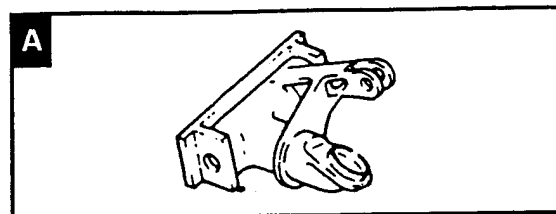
C-141 Main Landing Gear Bellcrank and Bellcrank Assembly.
